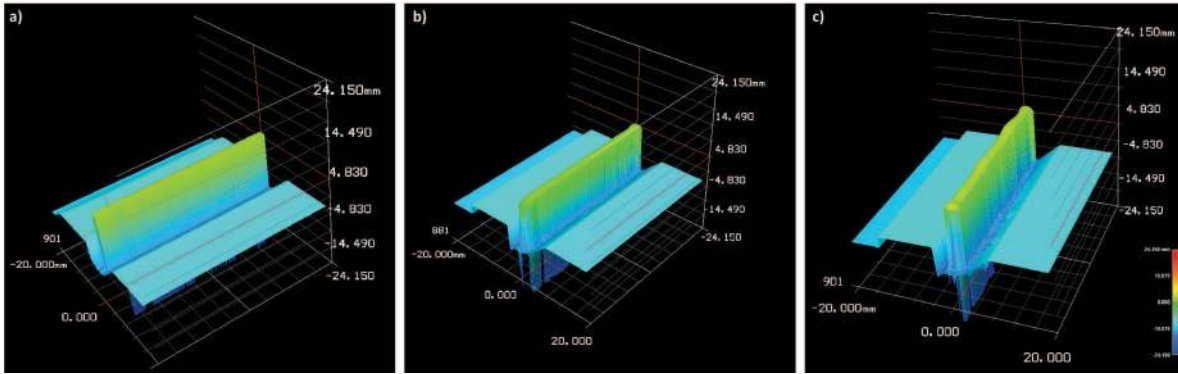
3D scanning modelling of a flat CBM: a) before welding, b) after welding without AM, c) after welding with AM
